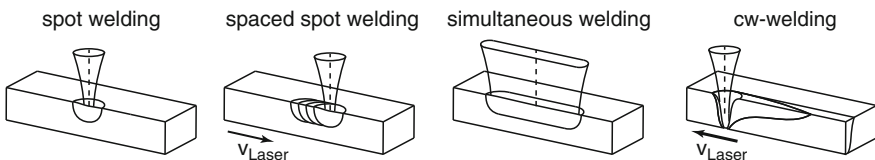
Half section sketches of the interaction zone in different welding technologies
